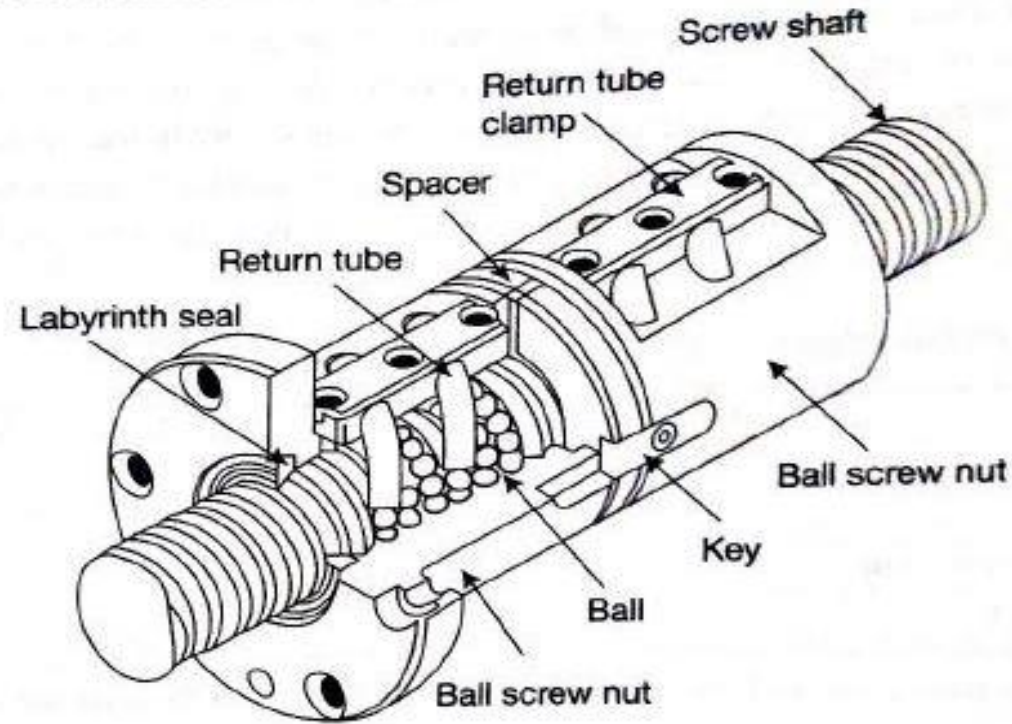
A recirculating ball screw and nut arrangement with external return tube (Courtesy, THK Co. Ltd., Japan)
